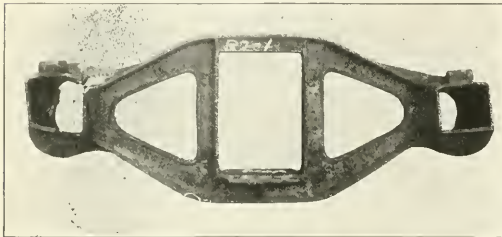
Book B, Test 4. Side Frame Welded in Tension Member. Failed at Journal Box. Breaking Load, 223,900 Lb.
